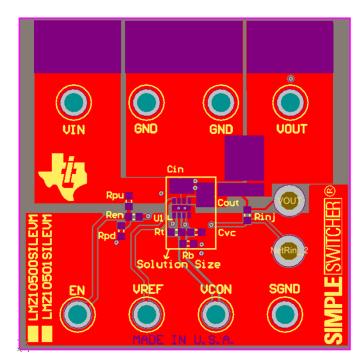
Evaluation Board Layout - Top Layer with Solder Mask and Top Overlay
